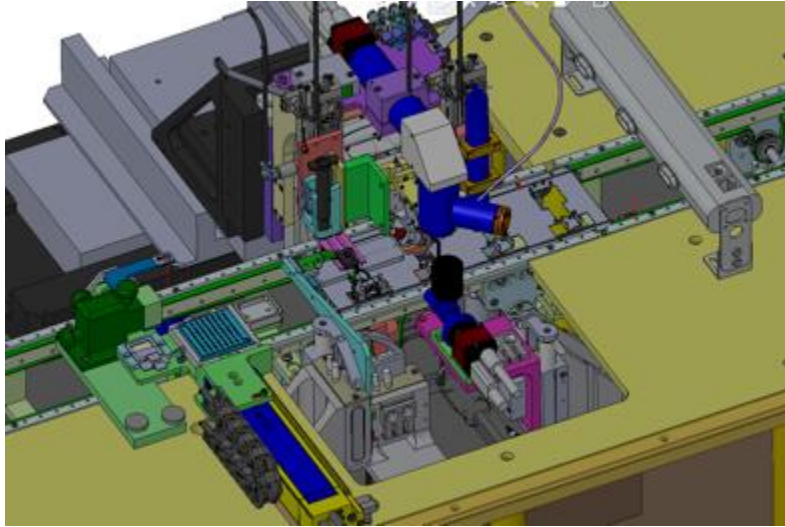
Packaging conveyer system for fast assembly of photonic components in package (image from Ficontec GmbH).
